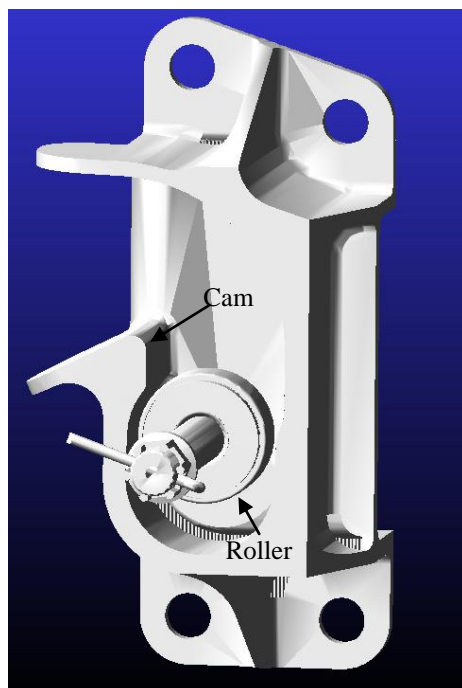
Upper guide on fwd side with cam (fuselage) and roller (door) pointed out
